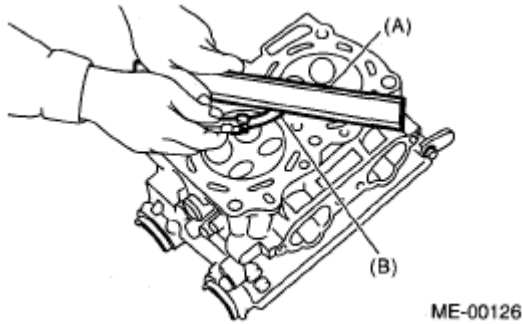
Measuring Warping Of Cylinder Head Surface Using Straight Edge And Thickness Gauge
